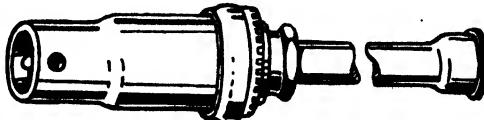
Slipping Spanner for Cylinder Nuts.
